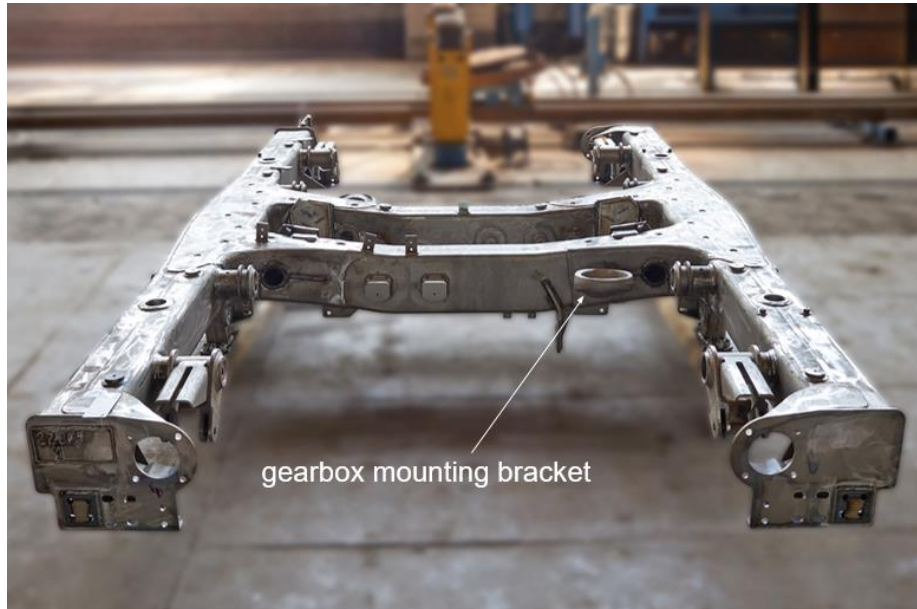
Bracket for mounting the gearbox of a 81-717 series carriage bogie.
